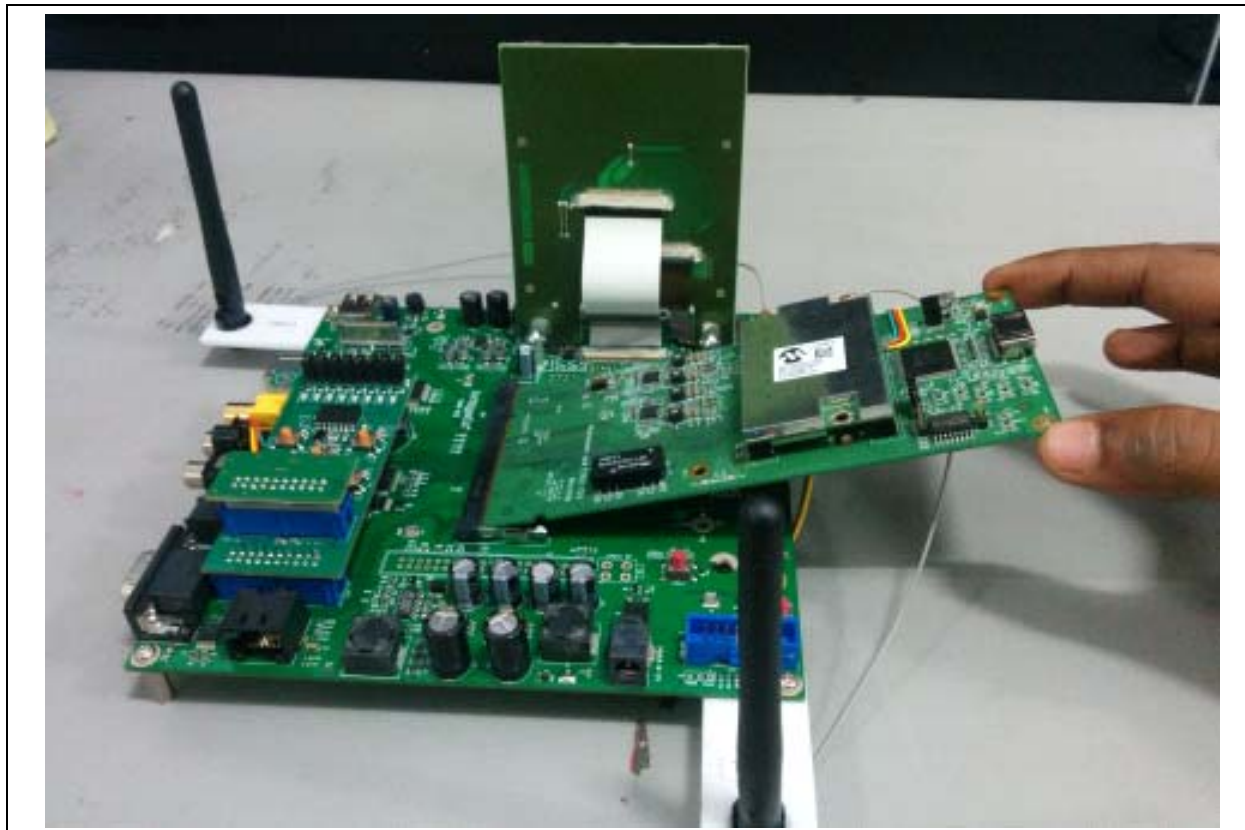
CY920 MODULE AND INTERCONNECT CARD ASSEMBLY
